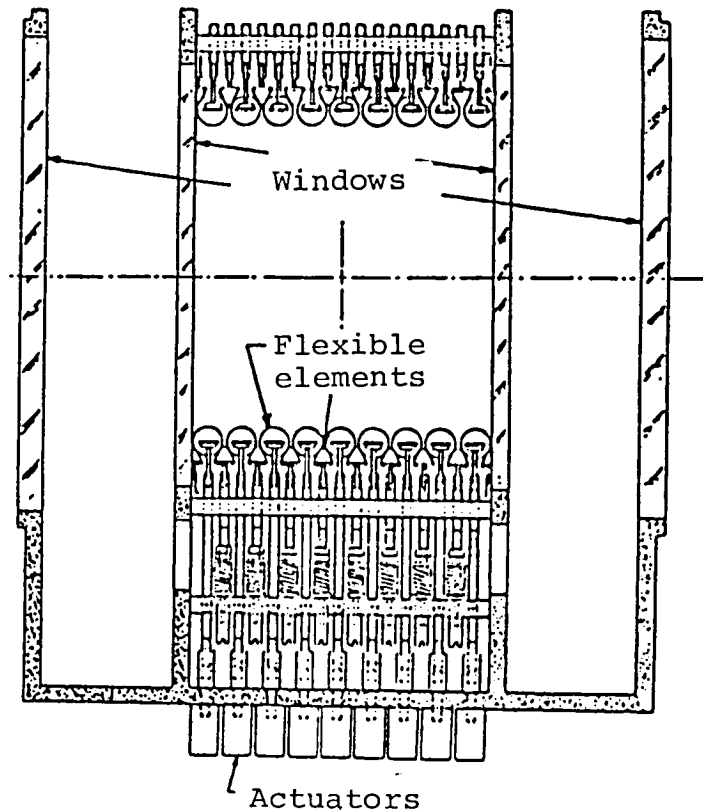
AFFDL Pilot Wind Tunnel With Flexible Wall Elements
